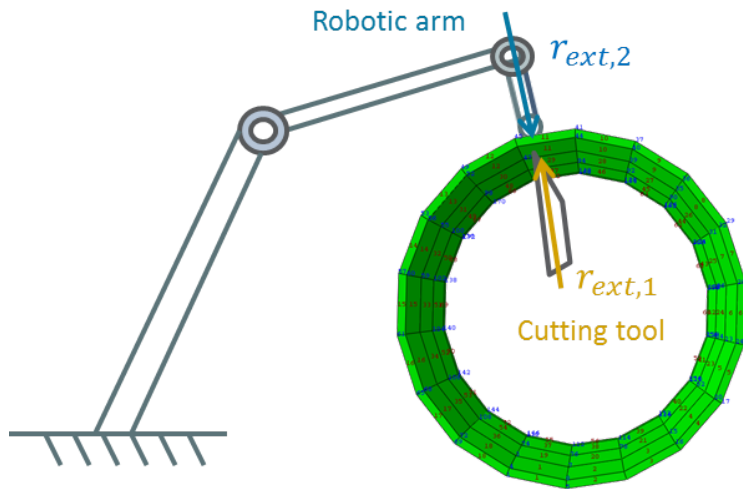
Placement of the cutting tool and robotic arm on the cylindrical workpiece
